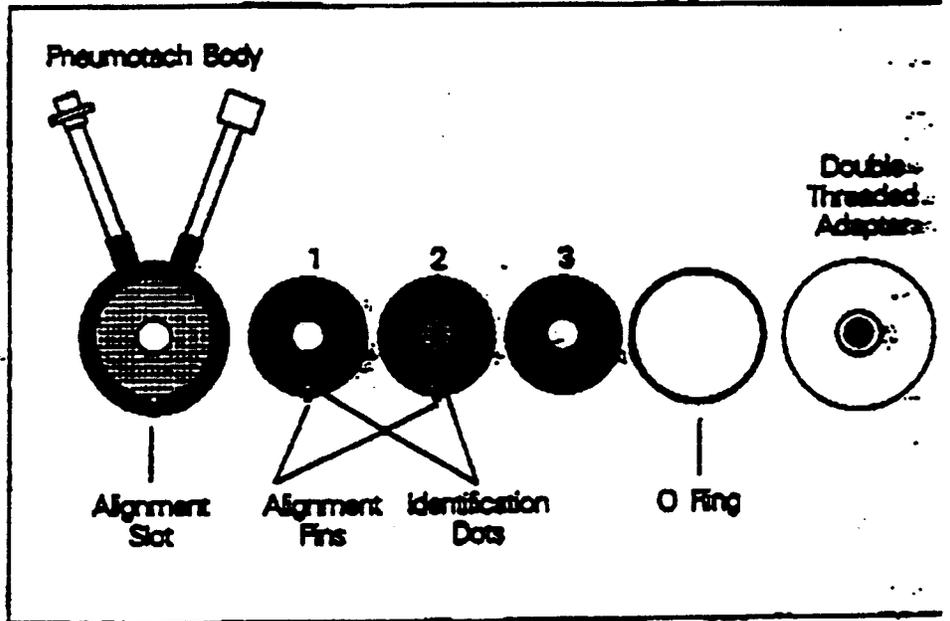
Exploded view of 10 LPM Pneumotach.
